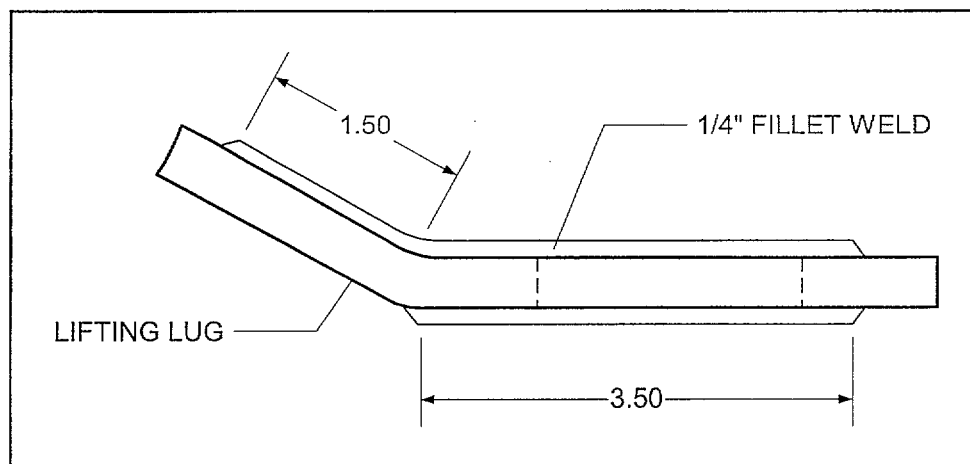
Lifting Lug Weld Configuration
